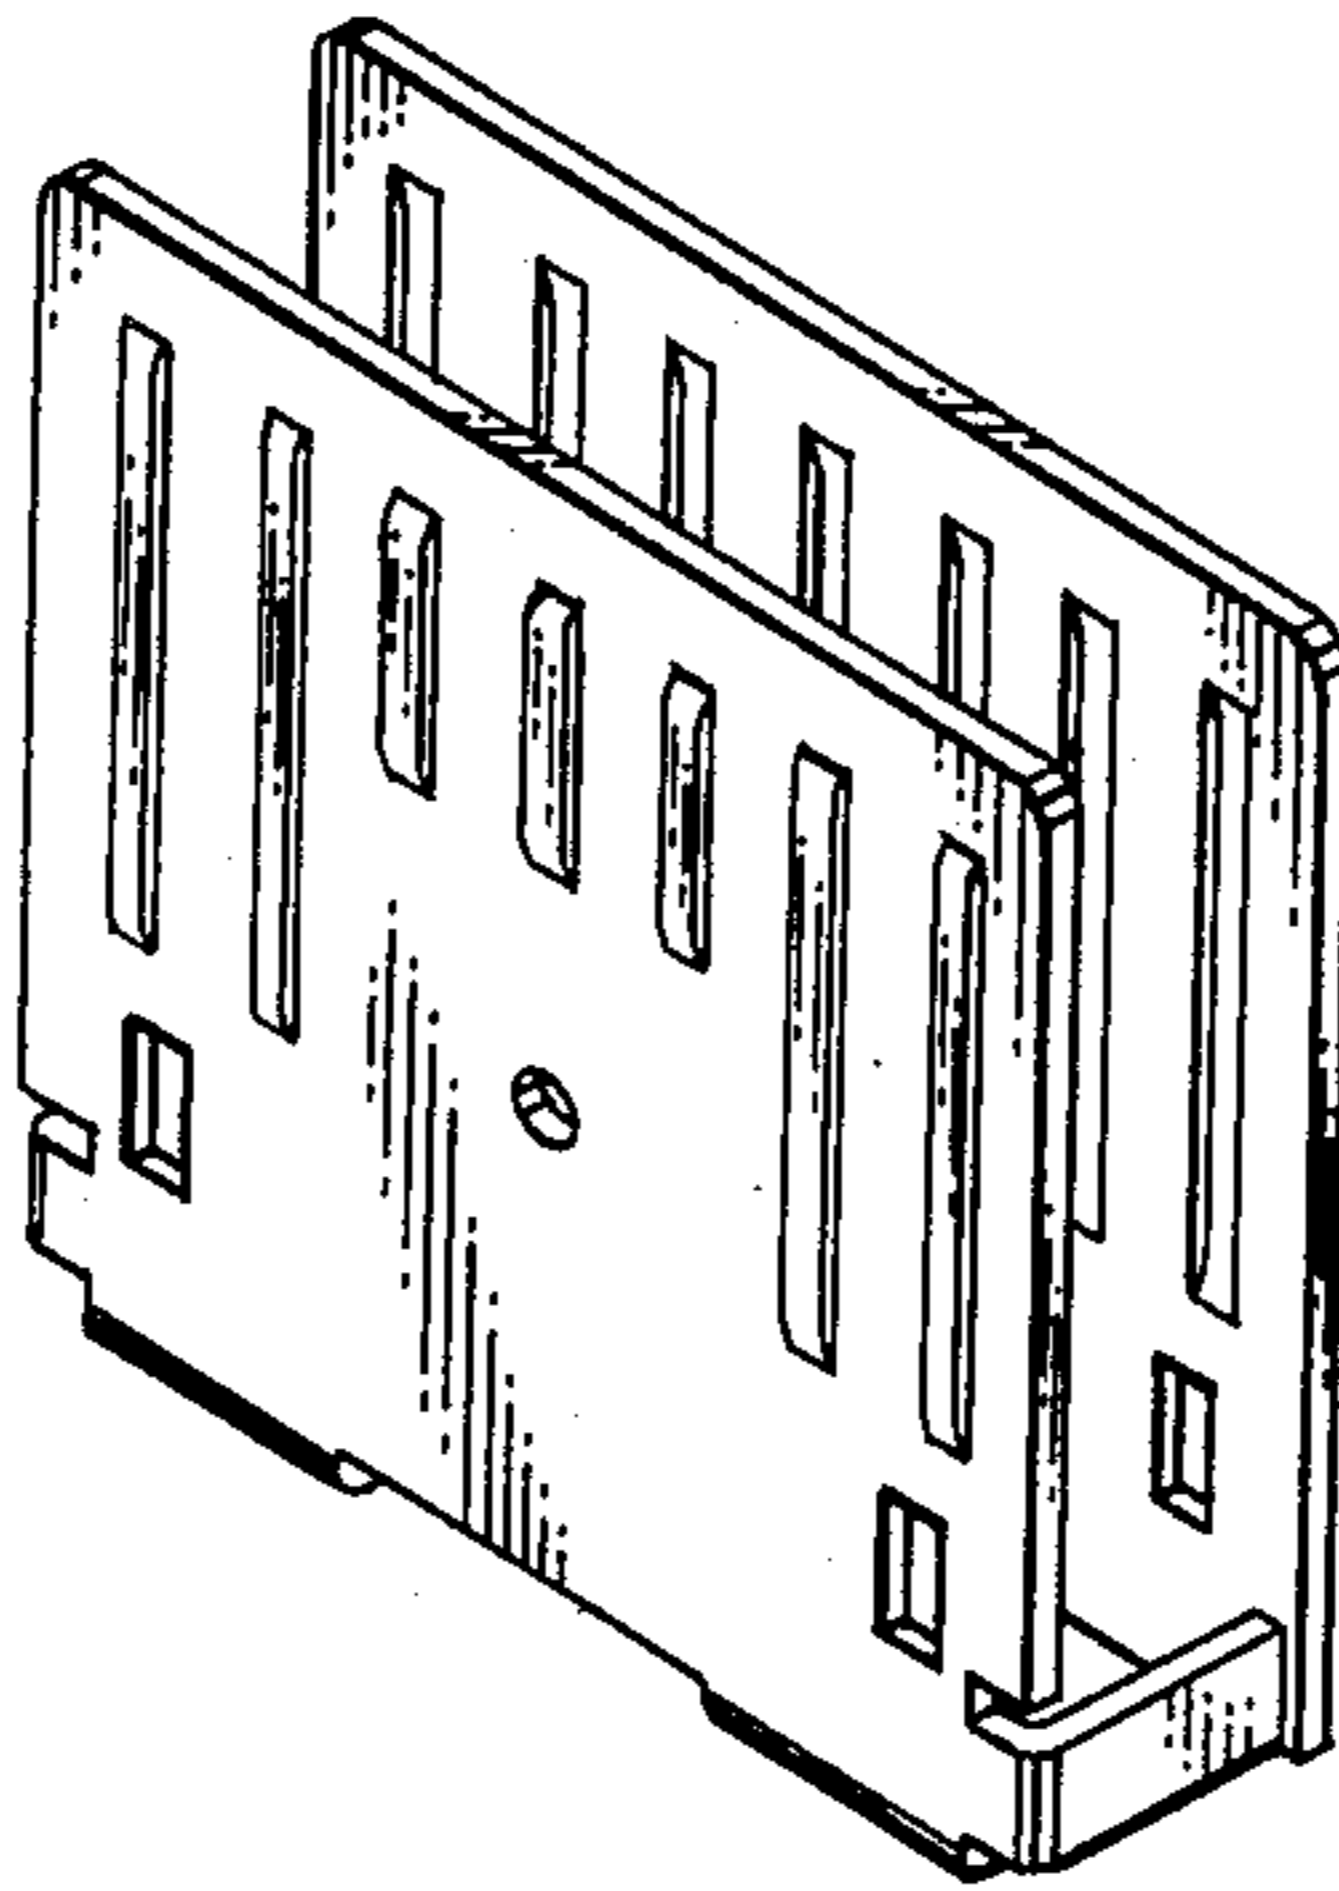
is a perspective view of a heat sink or similar article showing our new design;
